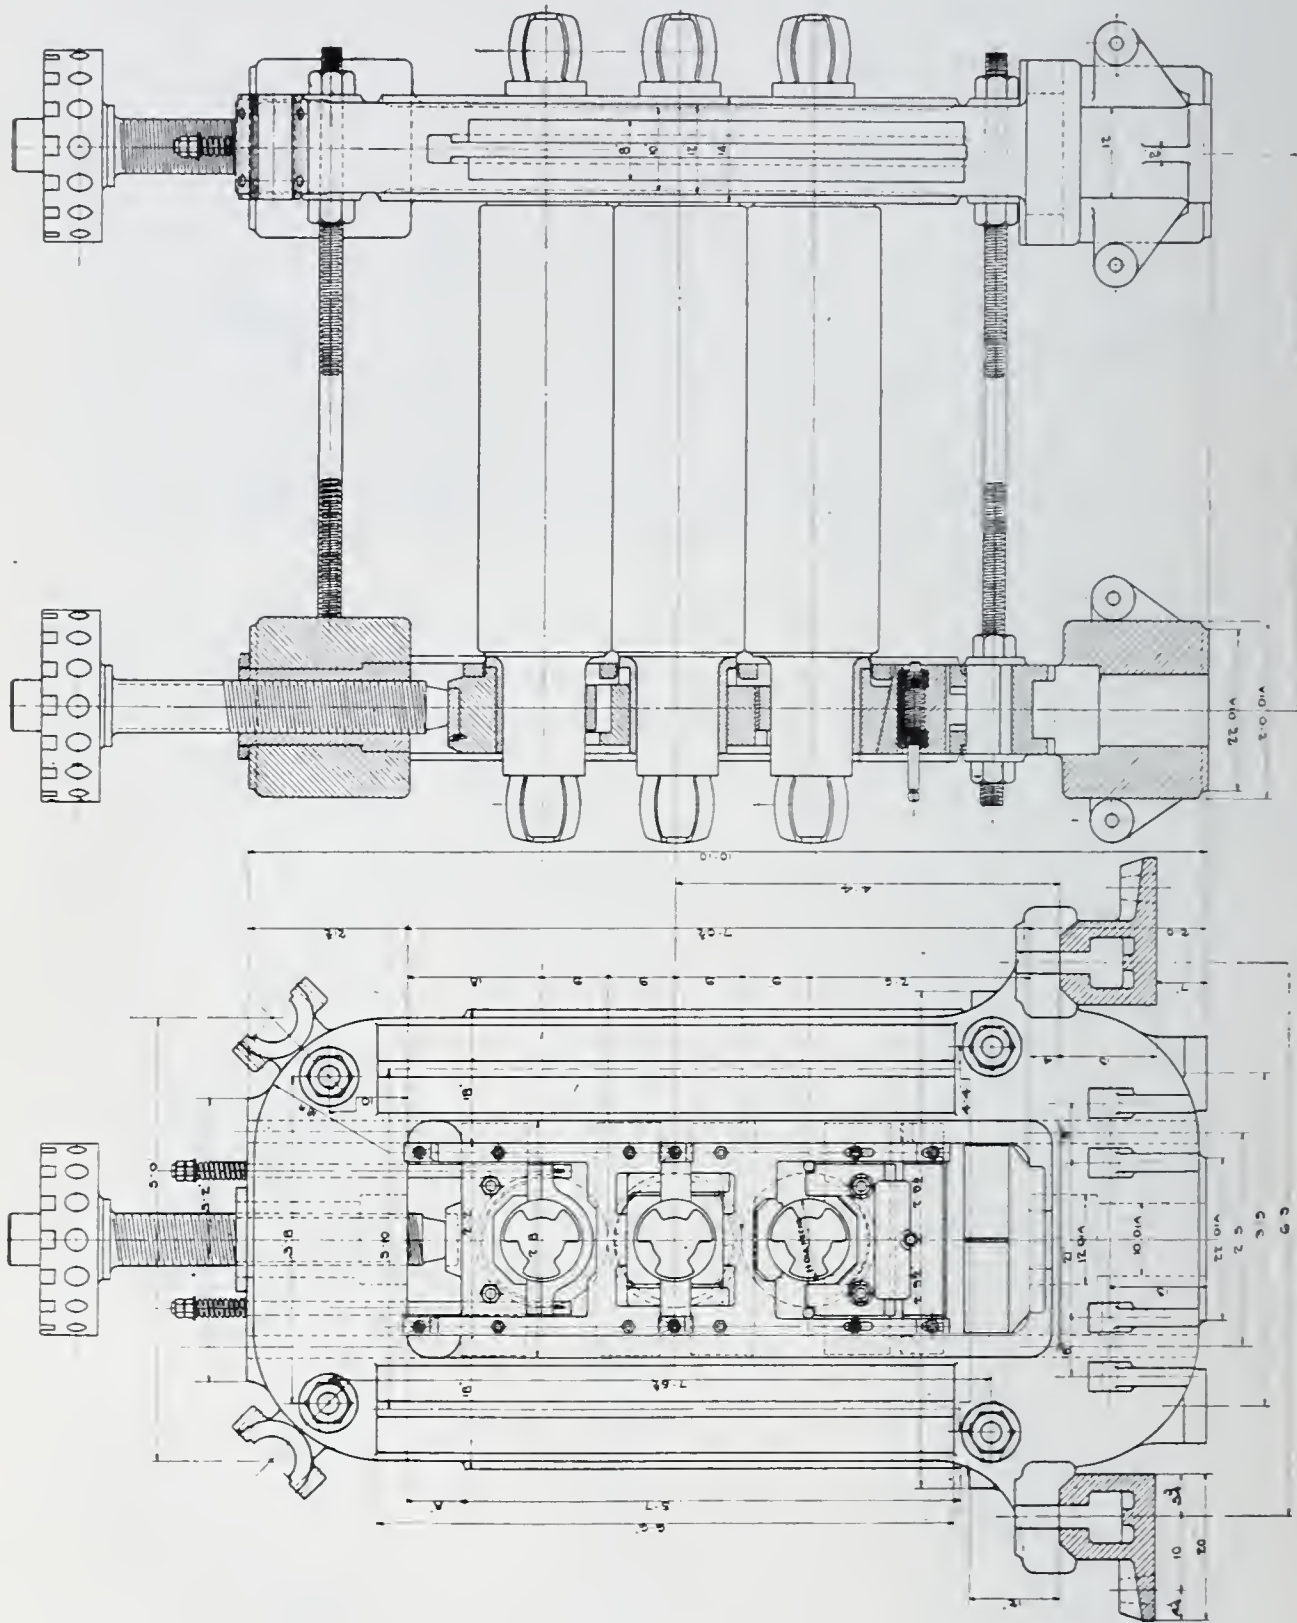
Arrangement of 18-Inch, Three-High Bar Mill.
